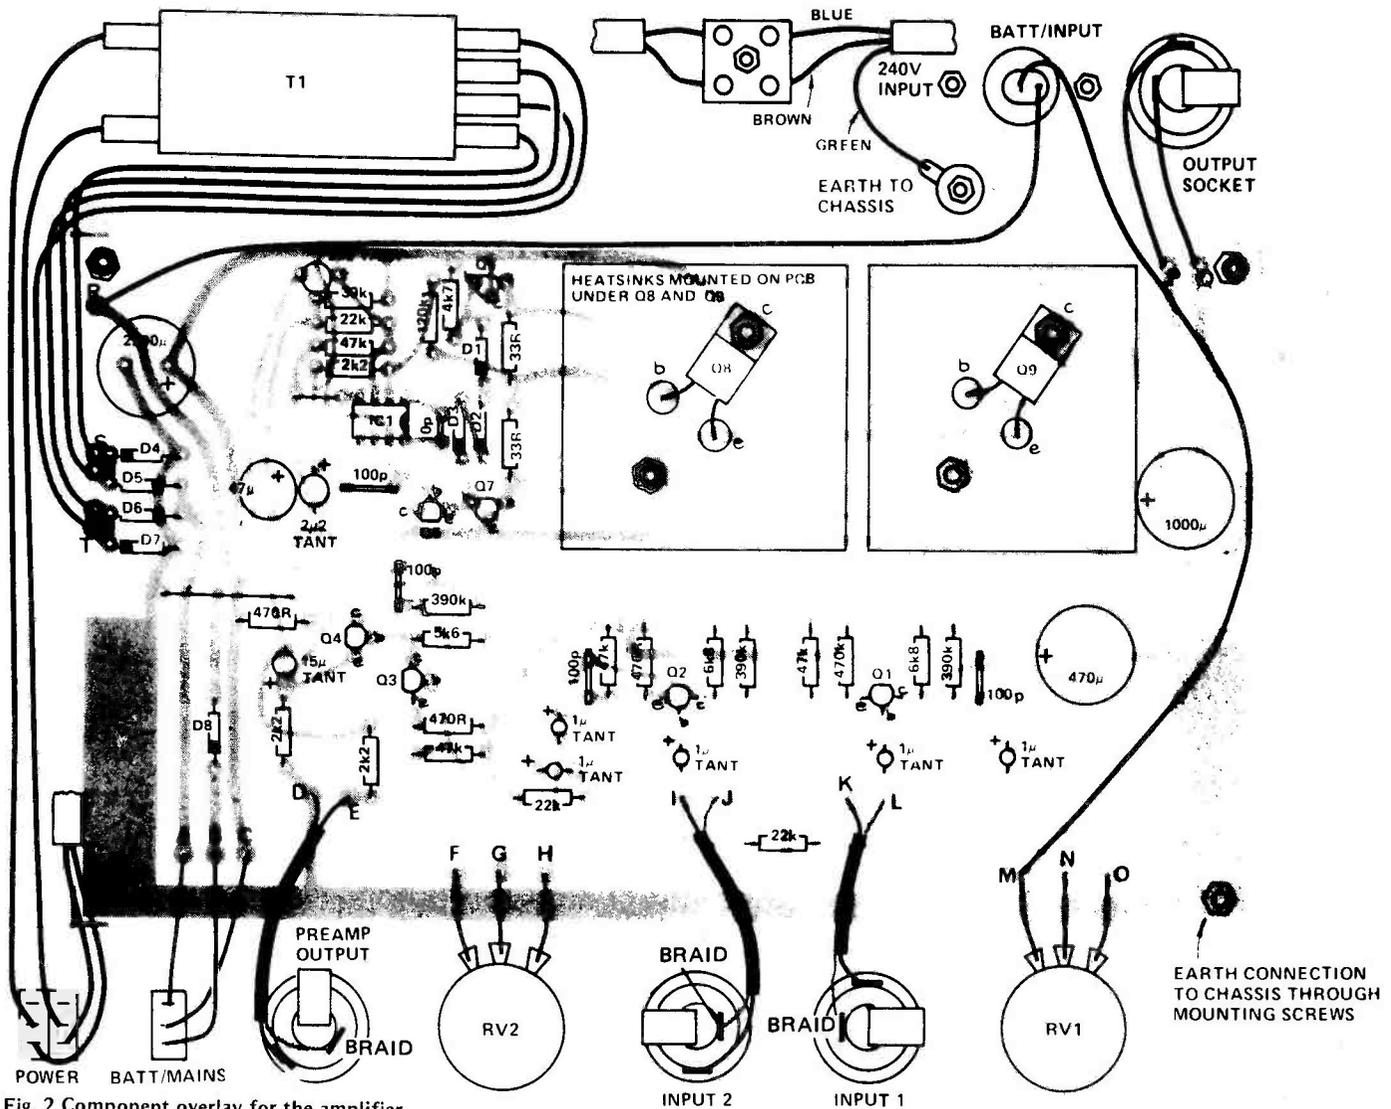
Component overlay for the amplifier. The original design used a BC639/BC640 complementary pair for Q6 and Q7, and these are shown on the overlay, but they may prove hard to obtain. Consequently the PCB we will be supplying is laid out for a BC140/BC160 pair, which have different pad layouts — the b,c and e pads are etched onto the board for your guidance.
